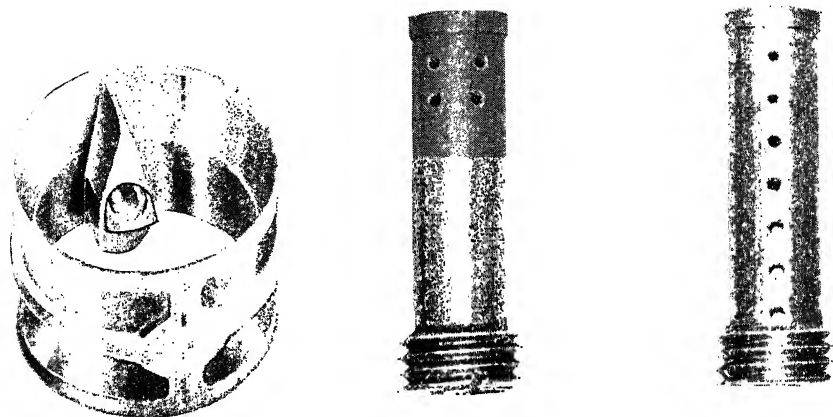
TWO TYPES OF DIFFUSER WITH CHOKE TUBE OF STREAMLINE TYPE.
